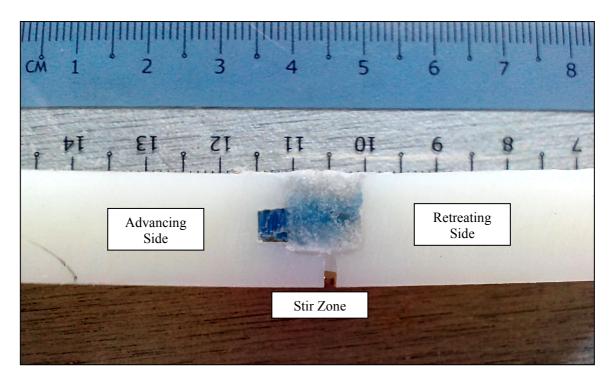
Cross-section of the butt weld joint at 25 mm/min
